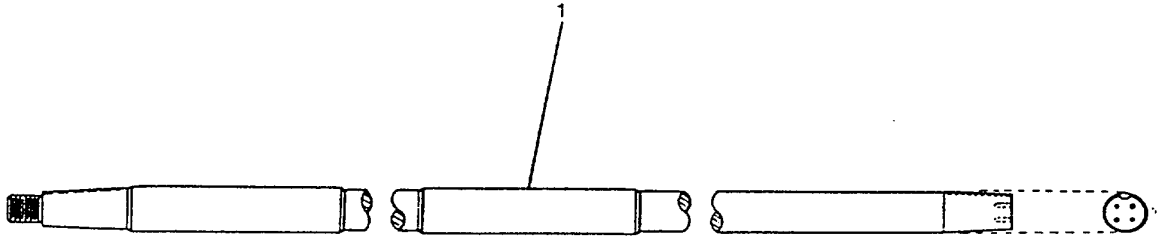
MAIN PROPELLER SHAFT AND BRAKE
